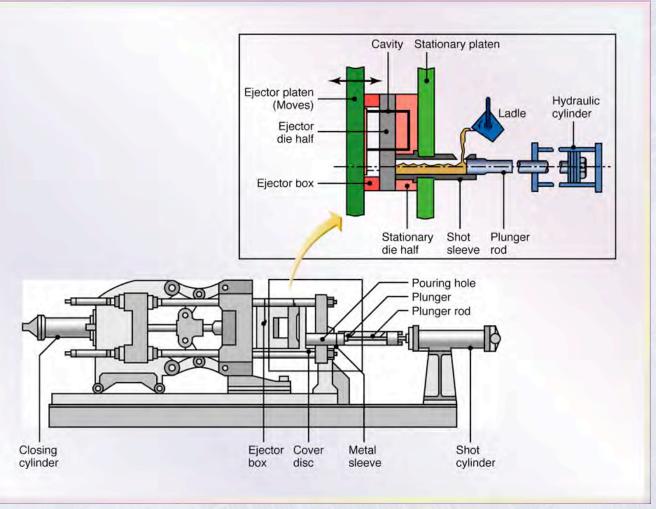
Schematic illustration of the cold-chamber die-casting process. These machines are large compared to the size of the casting, because high forces are required to keep the two halves of the dies closed under pressure.
